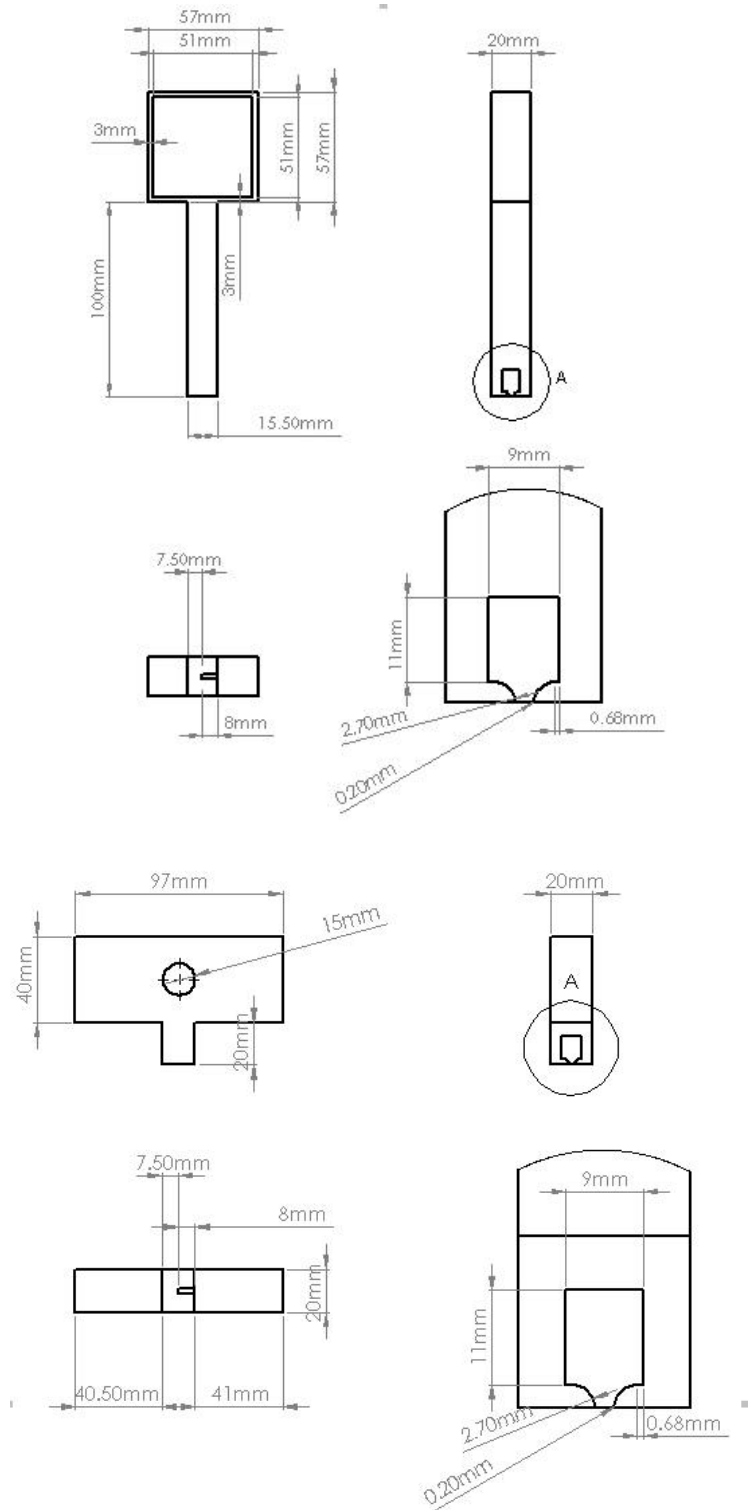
Technical Drawings of the Top and Bottom Grips.
